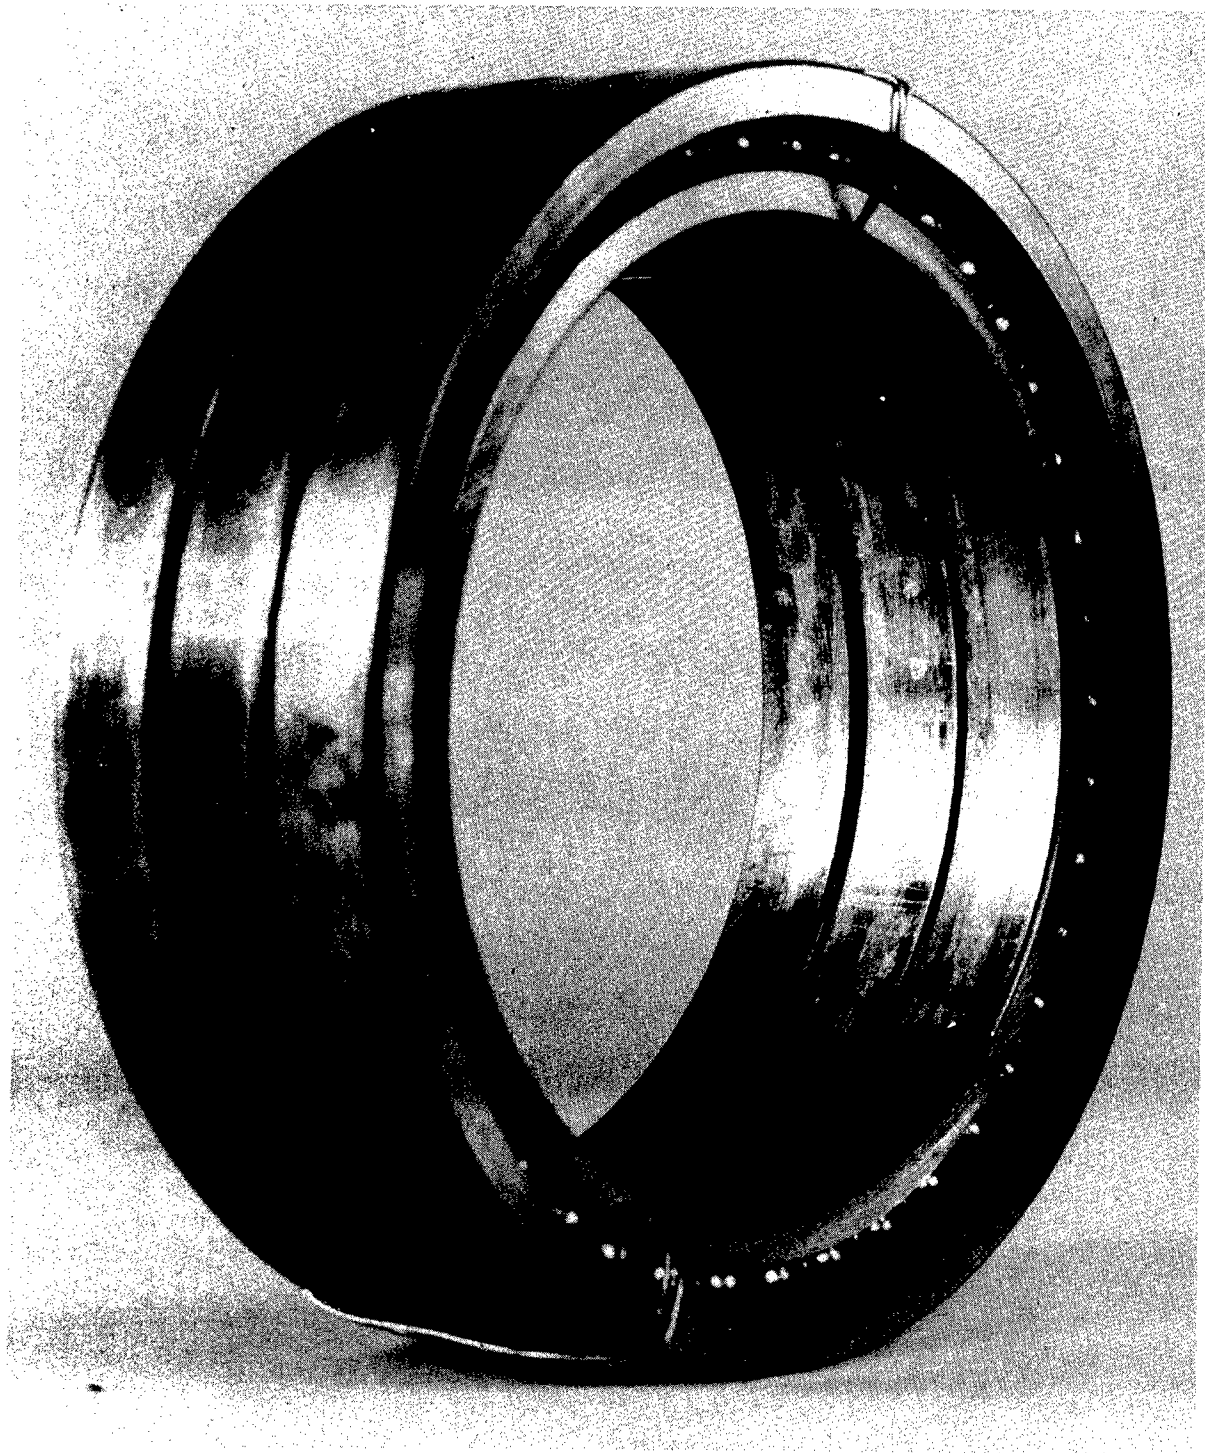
Back View, Galled Blade Bearings. Aeroproducts A422-69
